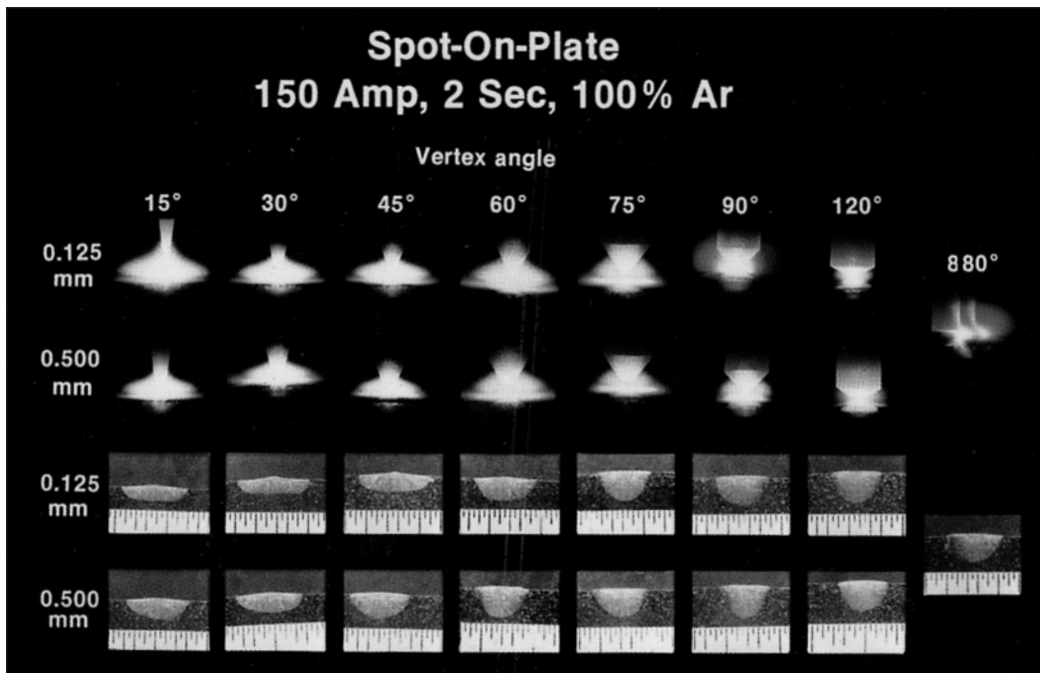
Arc shape and weld profile as a function of electrode tip angle. Image courtesy of *American Welding Society (AWS) Welding Handbook, 8th ed., Volume 2, "Welding Processes."* Miami: American Welding Society.
